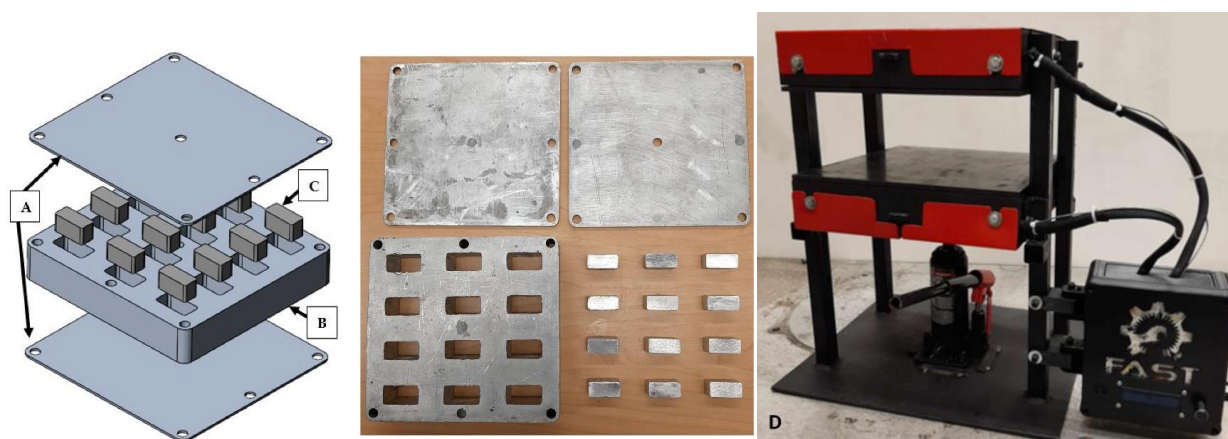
Laser-cut aluminum mold used for sample production [53]. (A) Mold Lid X2; (B) ASTM D695 Mold; (C) Mold Plug X12; (D) the open-source scientific hot press.
